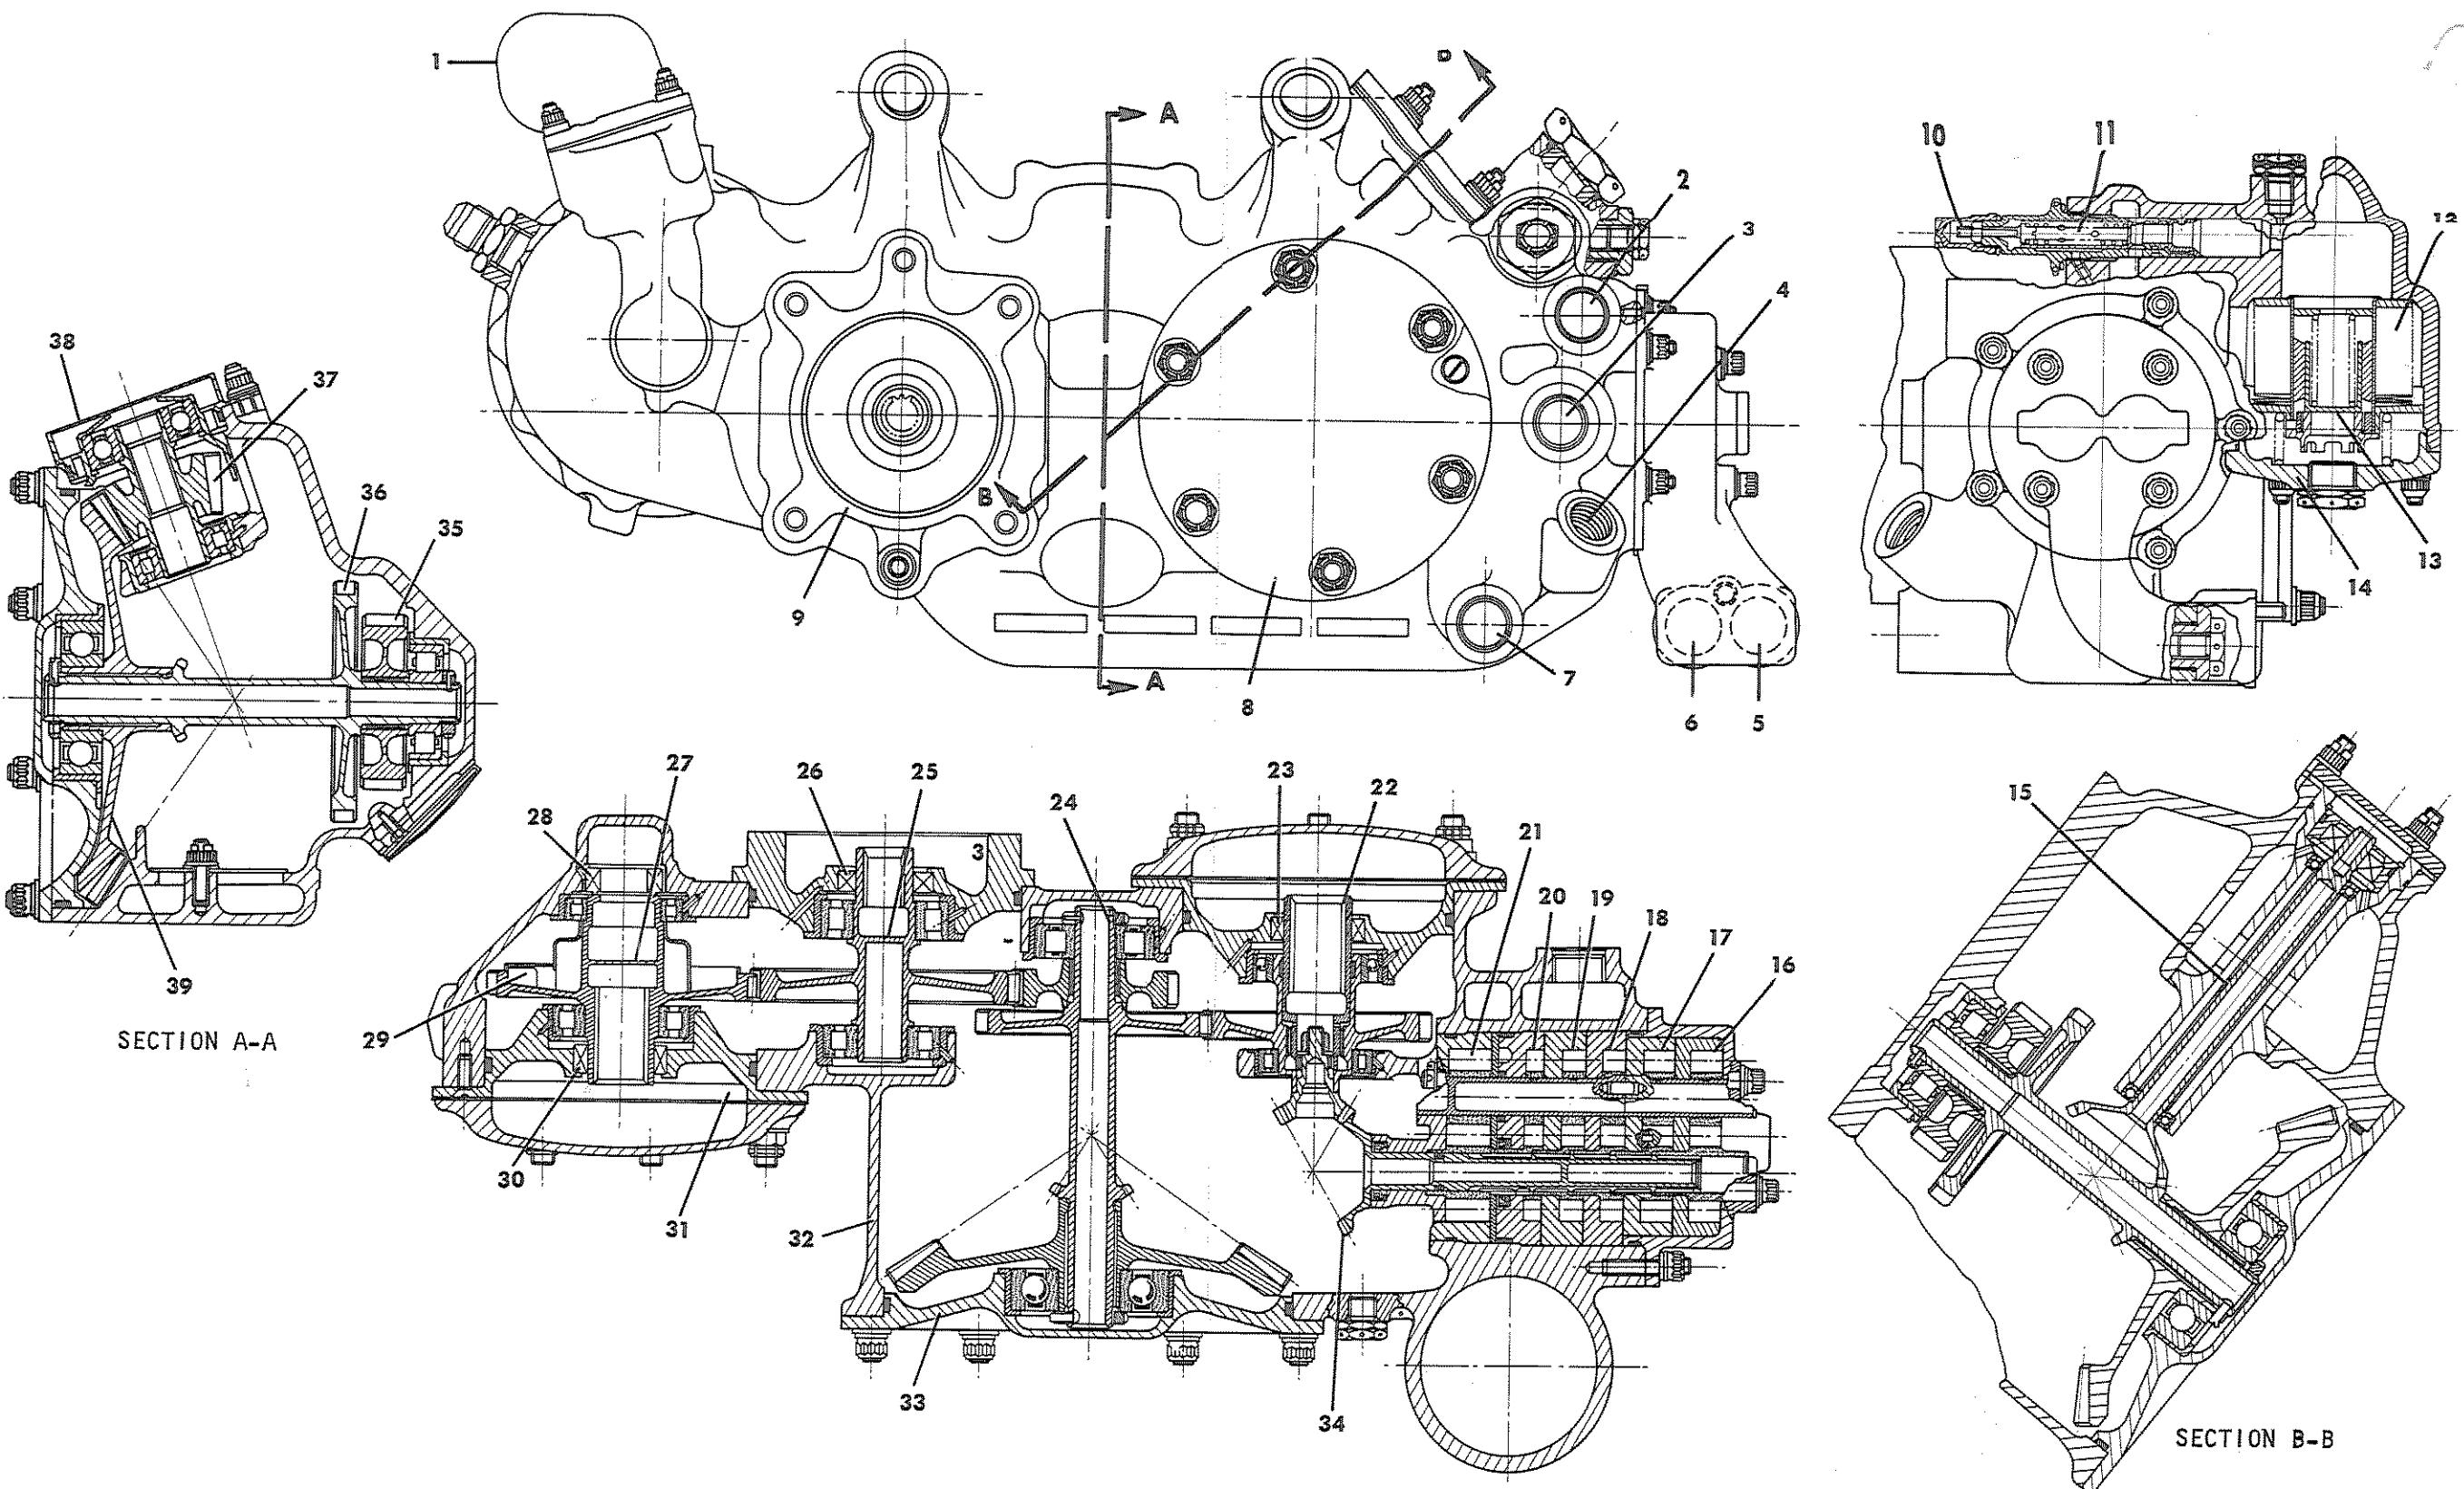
Cross-Sectional View of Component Drive Gearbox (JFTD12A-1 and -4A)
